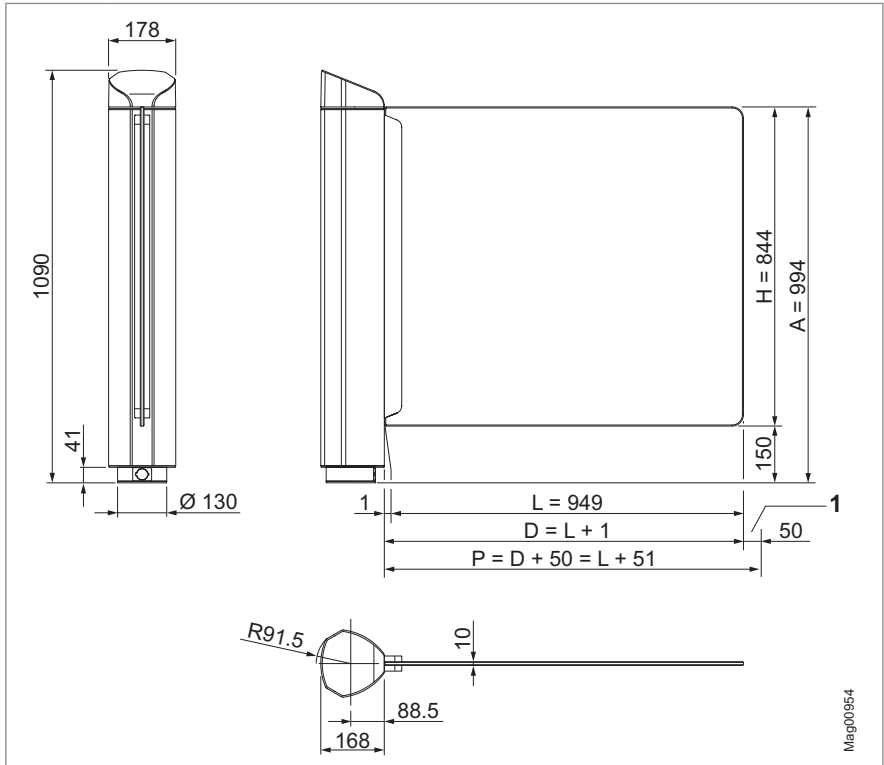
Dimensions mSwing with wing MWSW-MG (dimensions in mm)
